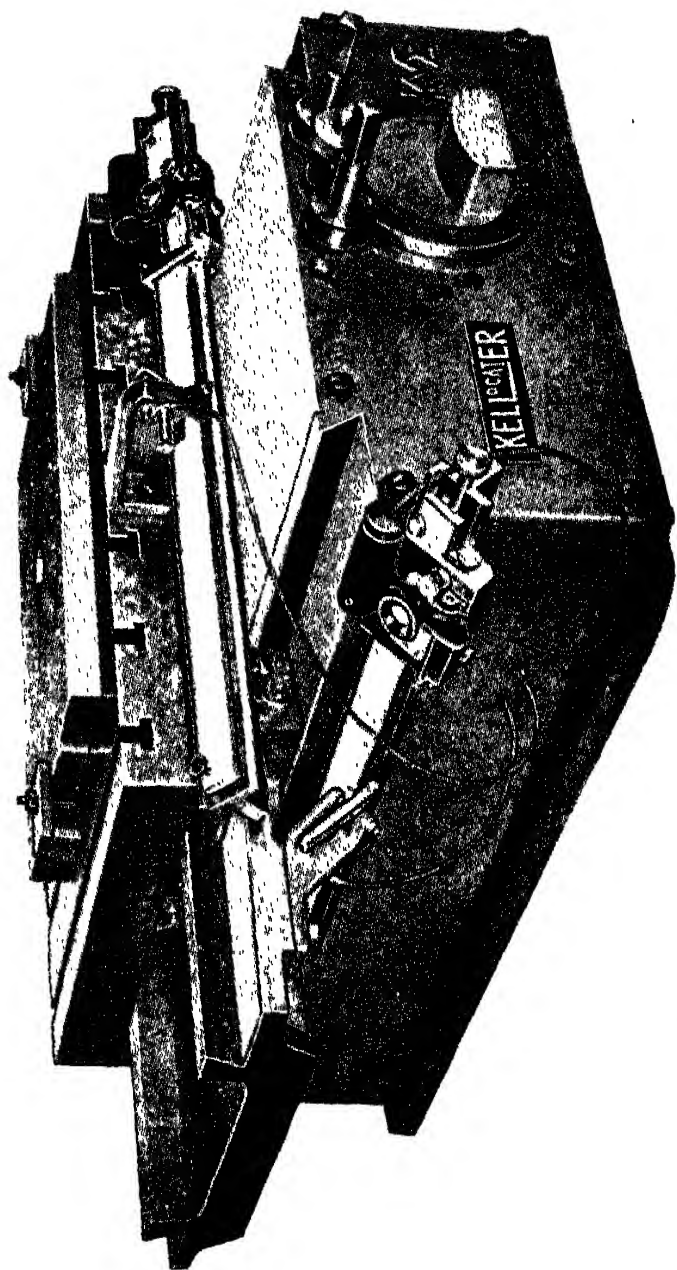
THE "KELLOCATER" JIG BORER ATTACHMENT
